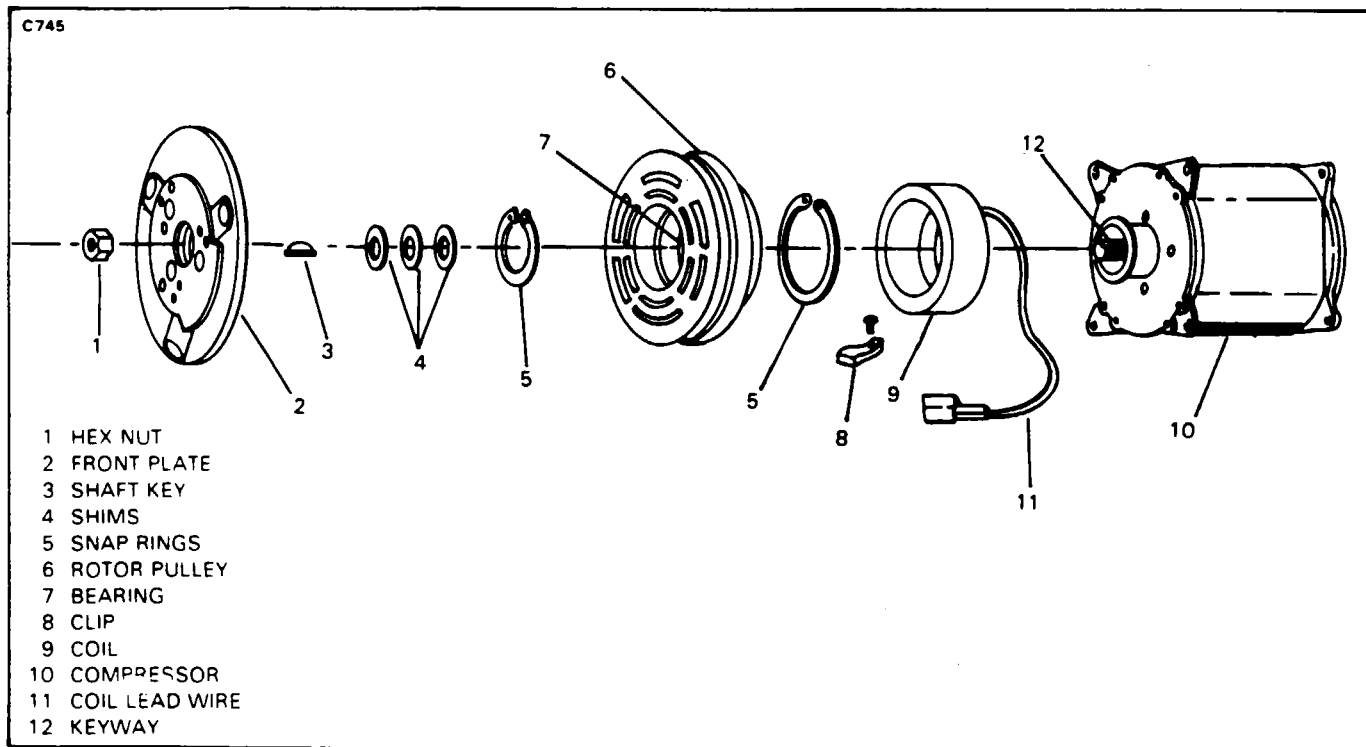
Magnetic Clutch Assembly (Sankyo Compressor)
